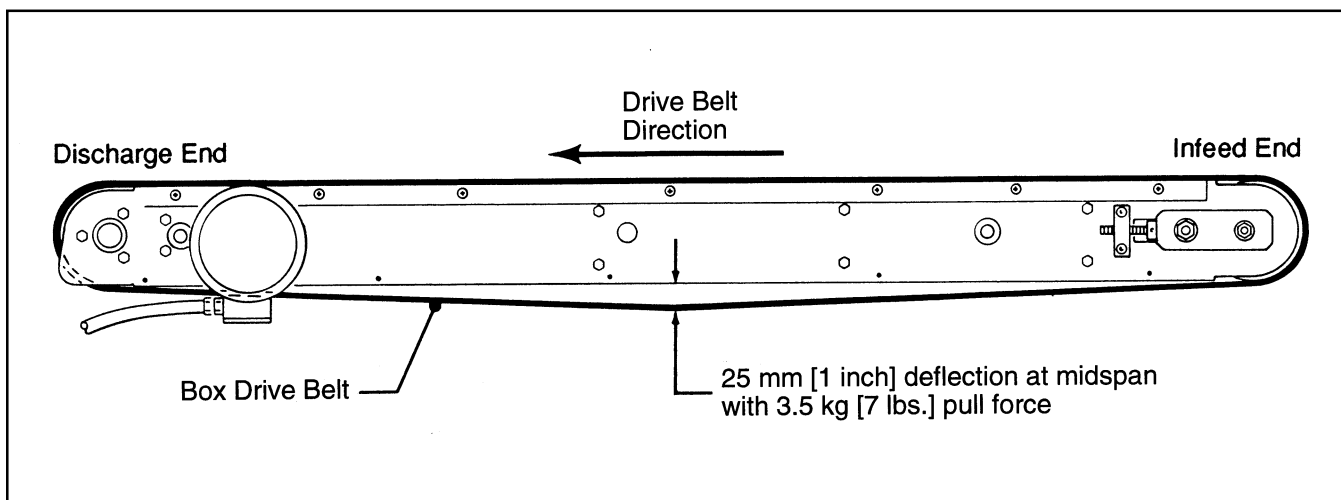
Tension Adjustment, Drive Belt (Top View)
